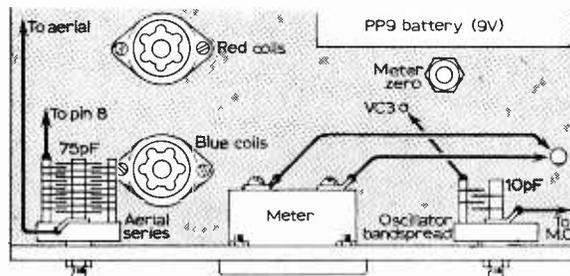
Top-chassis view showing positioning of the coils and front panel components.
